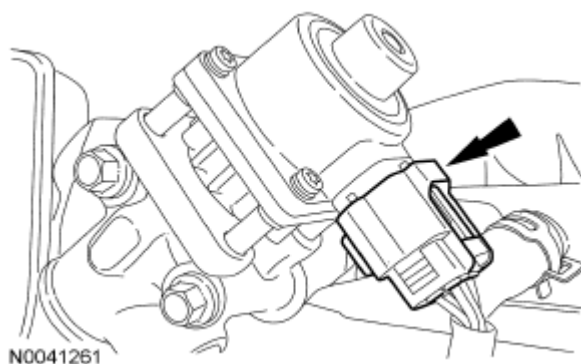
Locating Exhaust Gas Recirculation Valve Electrical Connector
